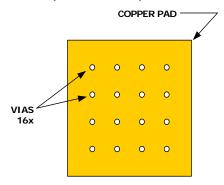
LAYOUT FOR THE EXPOSED PAD
